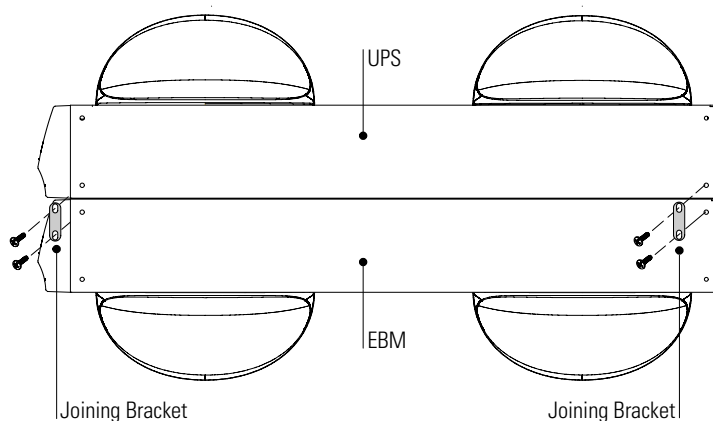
Installing the Joining Brackets (Top View with Pedestals)
